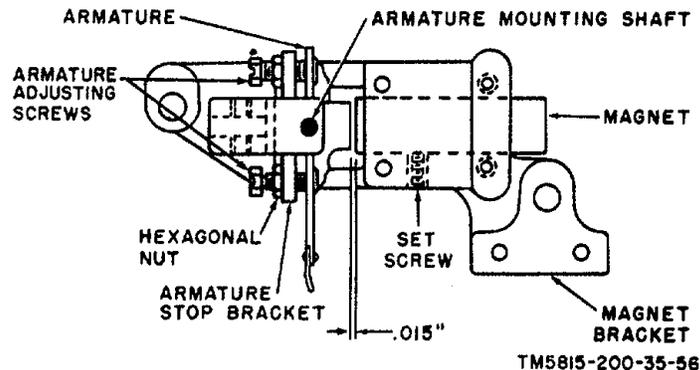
Armature stop bracket and bar magnet preliminary clearance.
